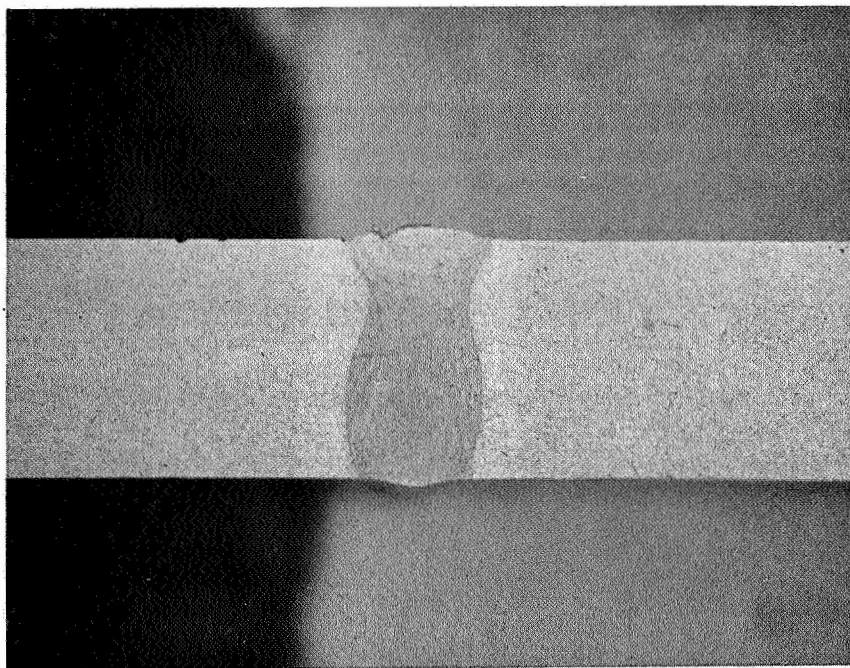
Weld Cross Section and X-ray Photograph of Weld No. 382,
